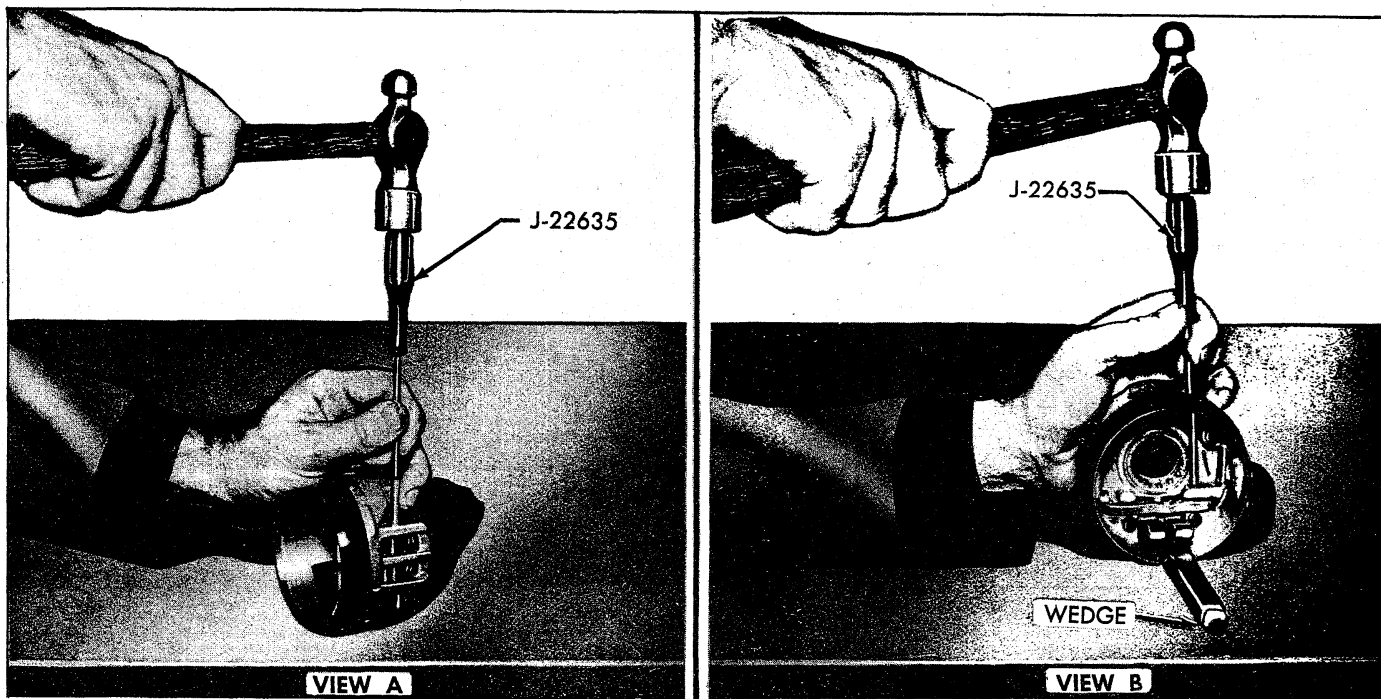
Removing Lock Shoe Retaining Pin Using Tool J-22635
